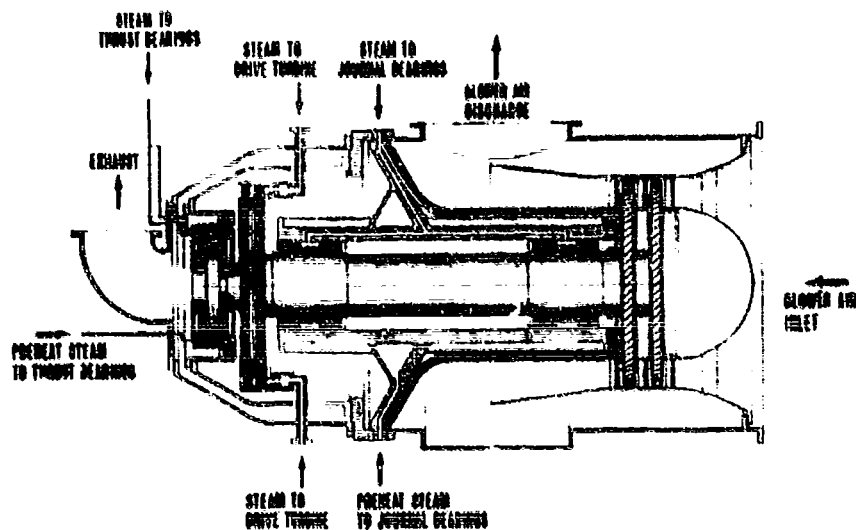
Schematic cross section of steam-lubricated forced-draft blower
